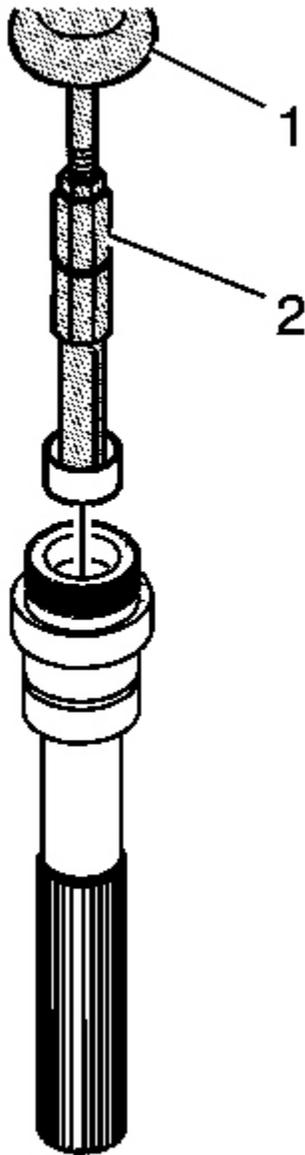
Using J 2619-01 & J 45548 To Remove Mainshaft Rear Support Bushing
